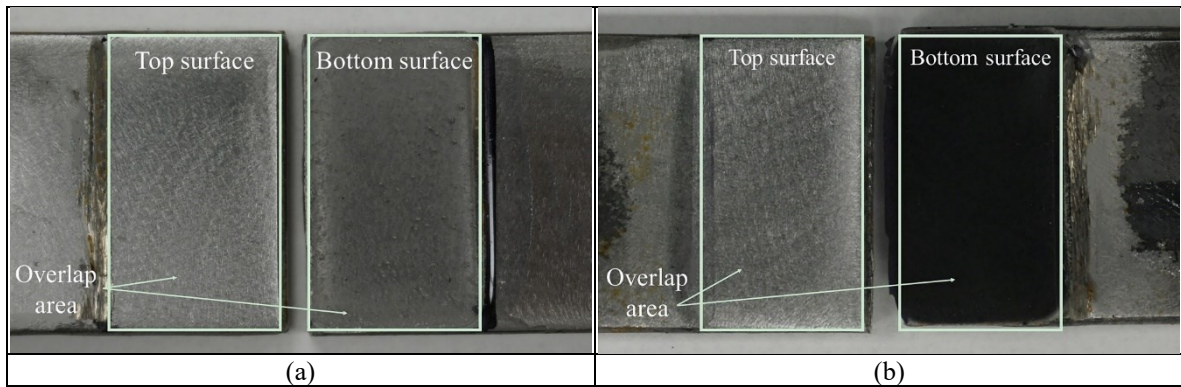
Typical fracture surfaces on smooth substrates: (a) the pure; and (b) the CNT-reinforced epoxy coating.
